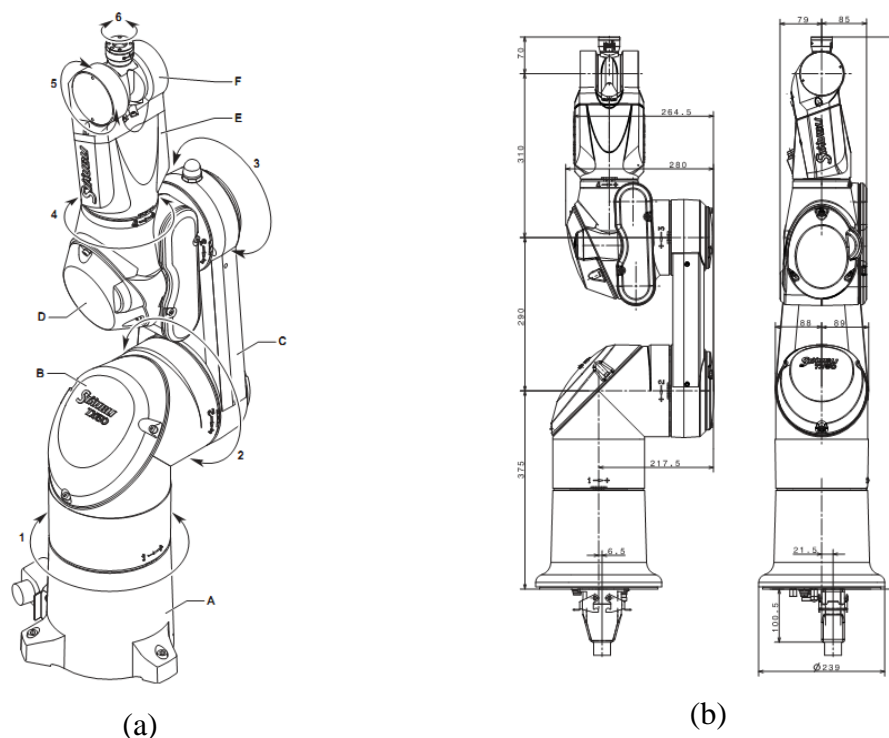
(a) Six main parts of the robot arm are: the base (A), the shoulder (B), the arm (C), the elbow (D), the forearm (E) and the wrist (F). (b) Dimension of each part of the robot arm.
